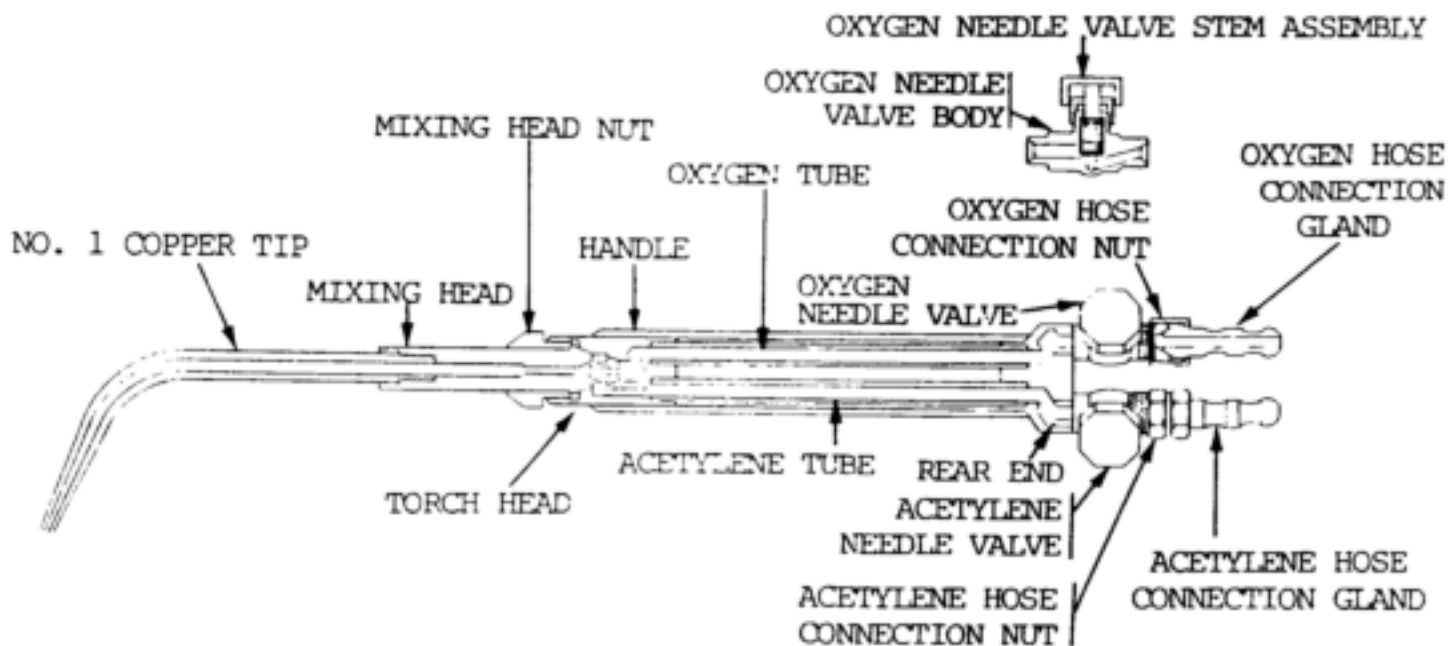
Equal pressure type general purpose welding torch.
